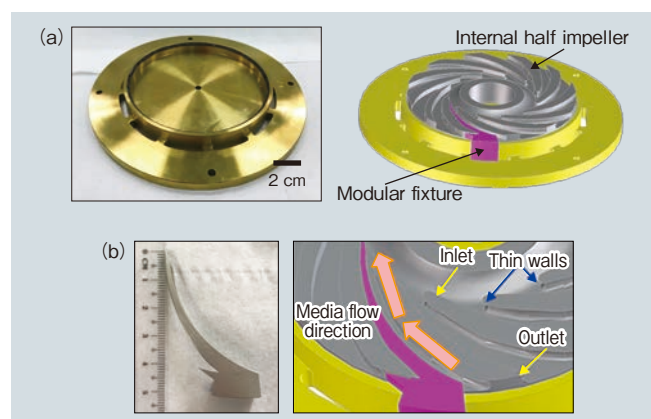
Pictures and schematic diagrams of (a) base plate of AFM fixture and (b) modular fixtures used for internal polishing of SLM-built impeller
